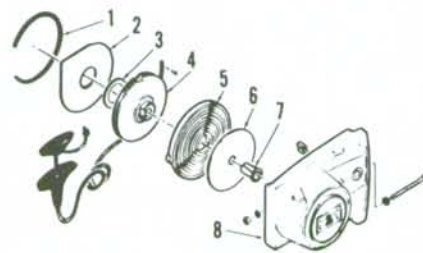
Exploded view of typical right hand rewind starter.
